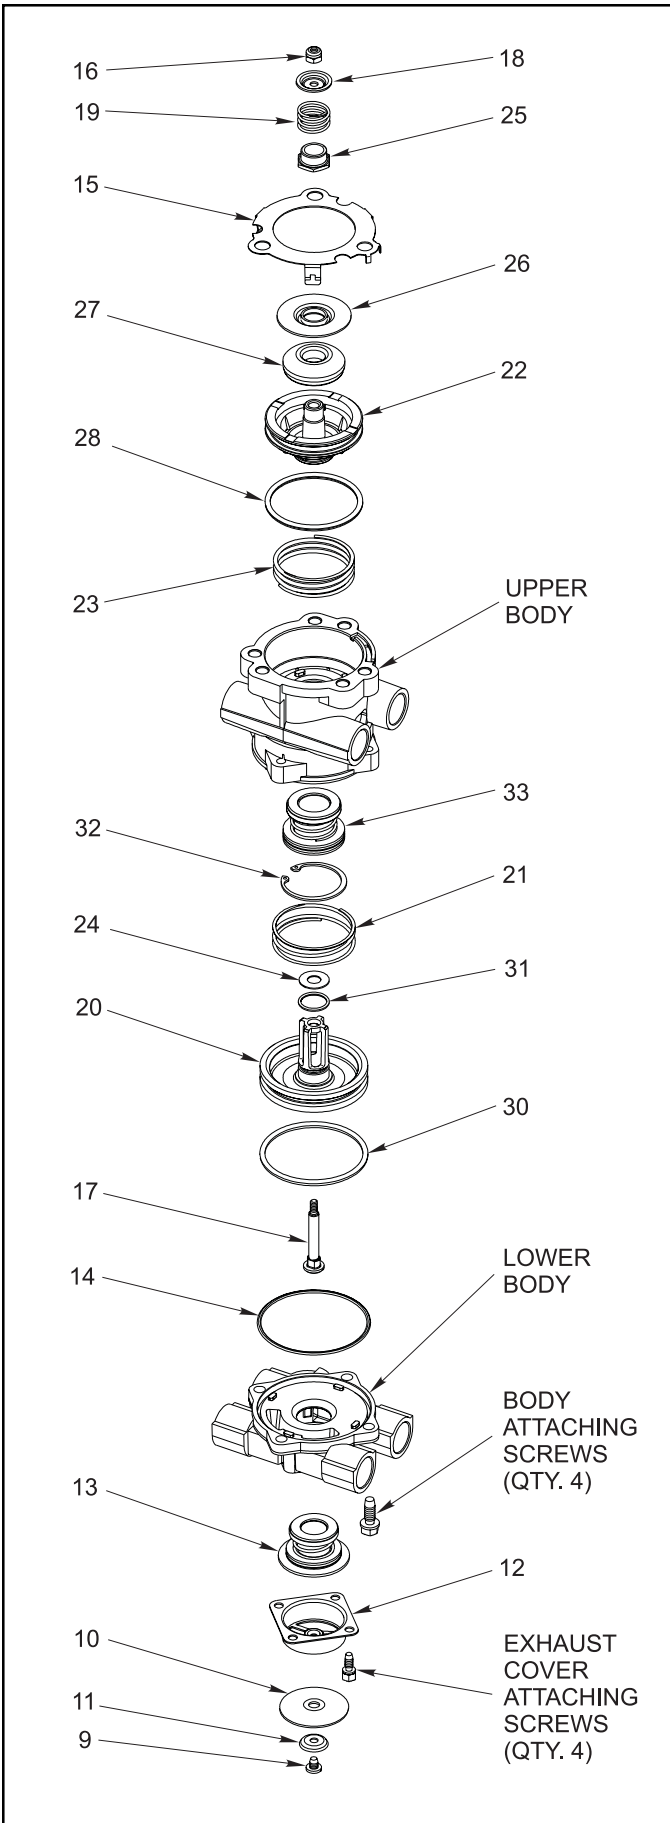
E-8P BRAKE VALVE EXPLODED VIEW
